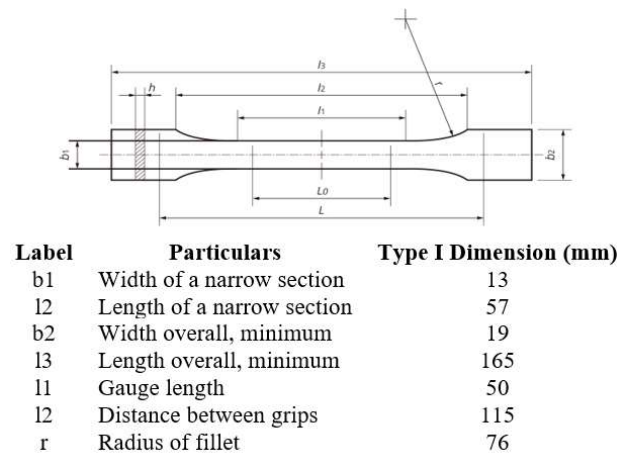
Dimension of tensile test specimen according to ASTM D638 Type I
